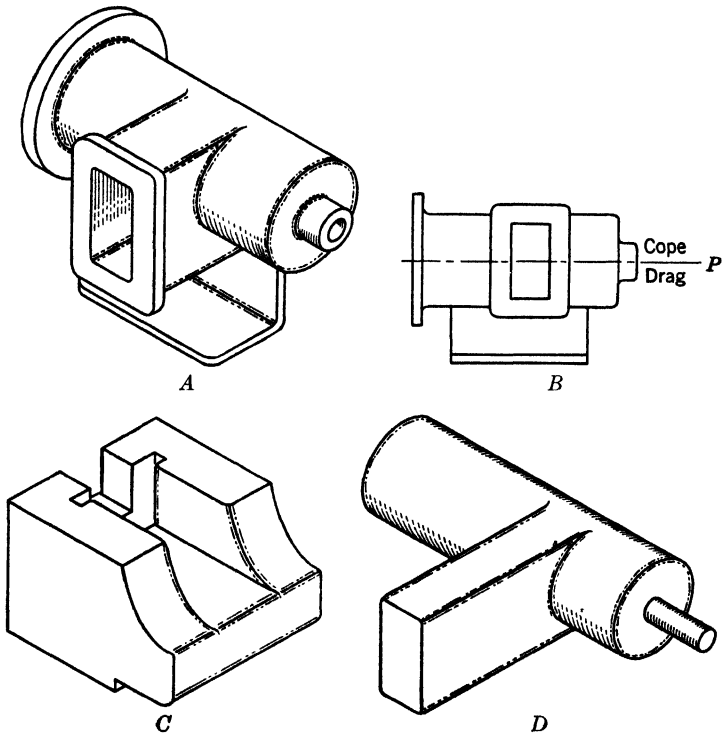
A. Casting. B. Parting plane. C. Core to form part of casting and to support center core. D. Center core.
